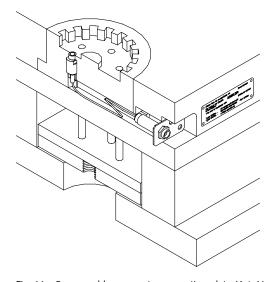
Sensor, cable, connector, mounting plate (Art. No. 65005208) and identification label
